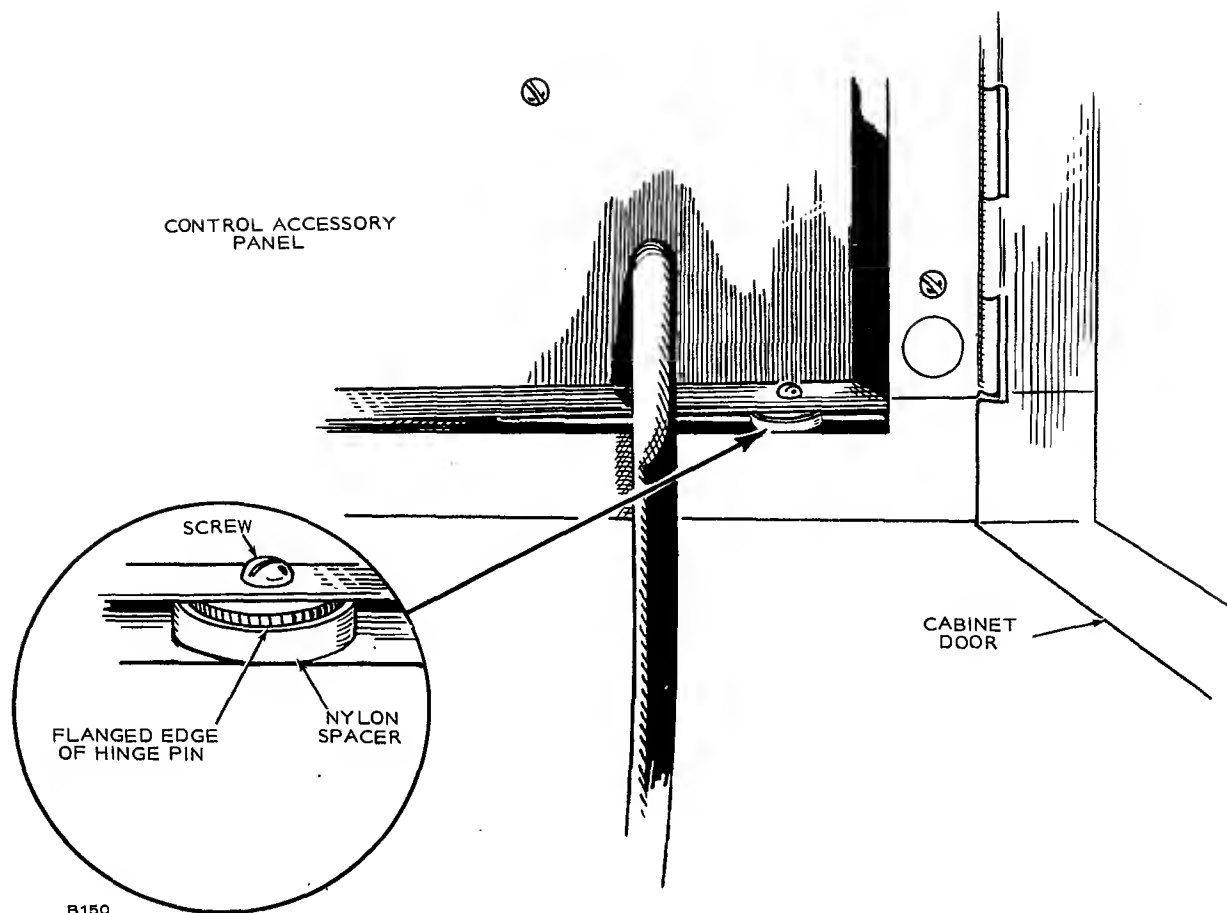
BOTTOM HINGE PIN FOR CONTROL ACCESSORY PANEL
